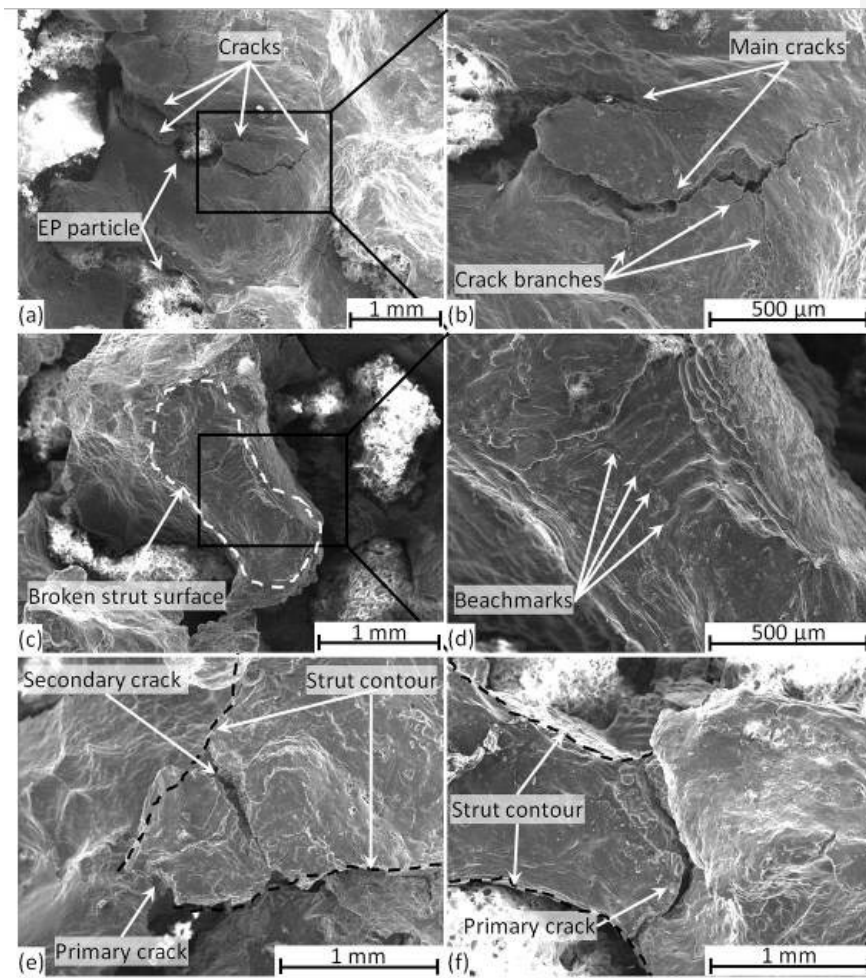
Branching cracks originating from EP particle (a) and its magnified view (b); the crack surface of a strut (c) and its magnified view revealing fatigue beachmarks (d); strut showing extensive necking (e) and a broken strut (f)
